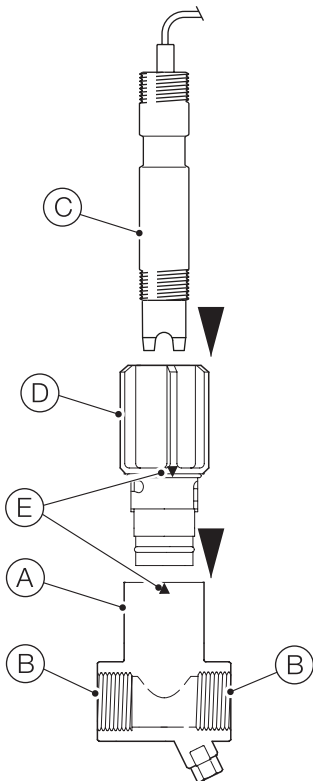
Bayonet T-piece assembly installation – BSP/NPT
